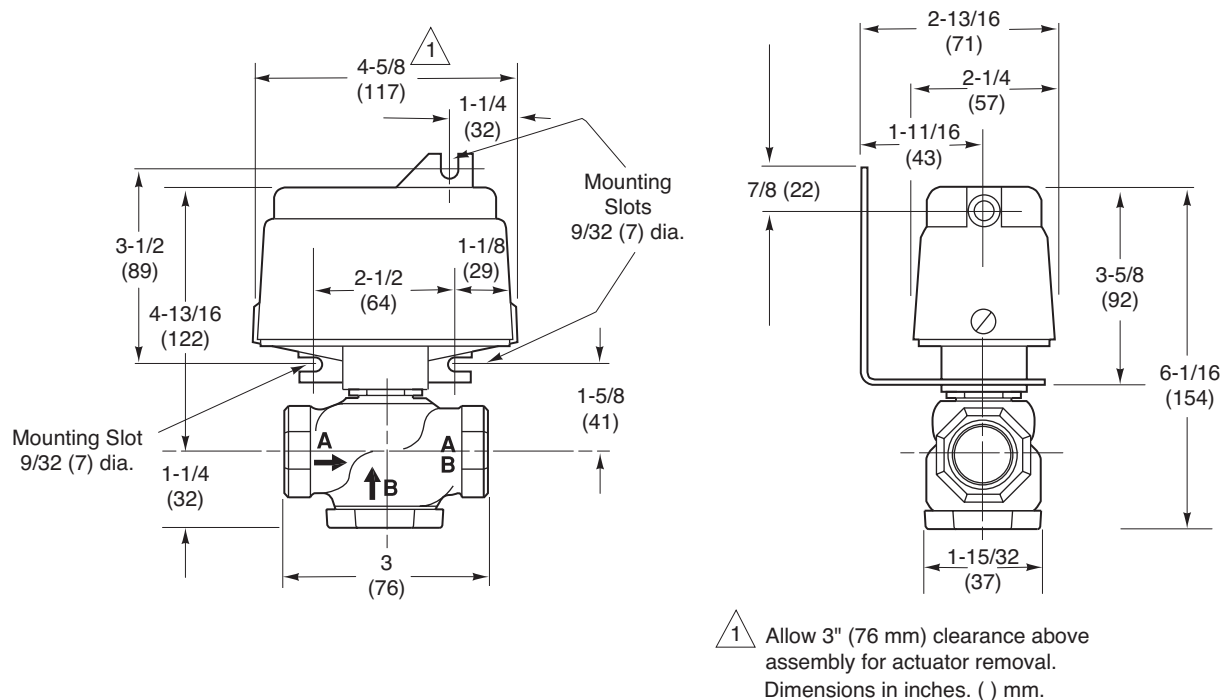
AL-161-4 Air Switching Valve Dimensions.
